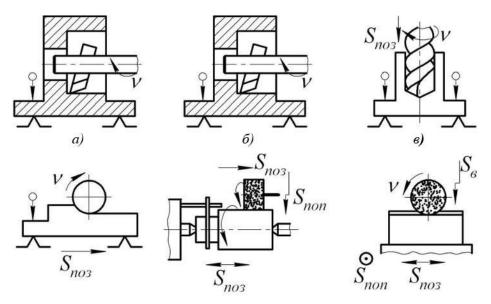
Workpiece processing schemes: a– turning; b – boring; c – drilling; d – milling; d – grinding on a circular grinding machine; e – grinding on a flat grinding machine
